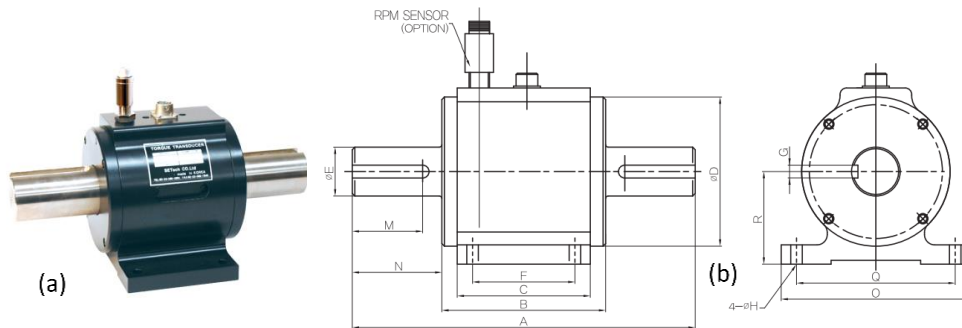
(a) Torque Transducer and (b) Dimensions of the Torque Transducer
